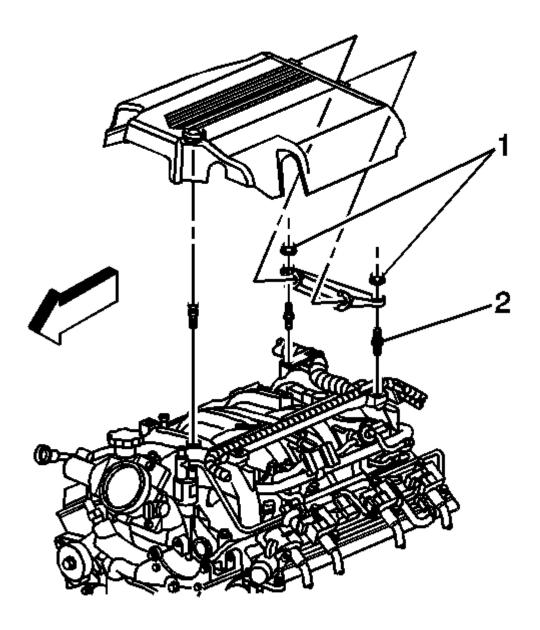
View Of Sight Shield, Bracket, Retainer Nuts & Studs Courtesy of GENERAL MOTORS CORP.
